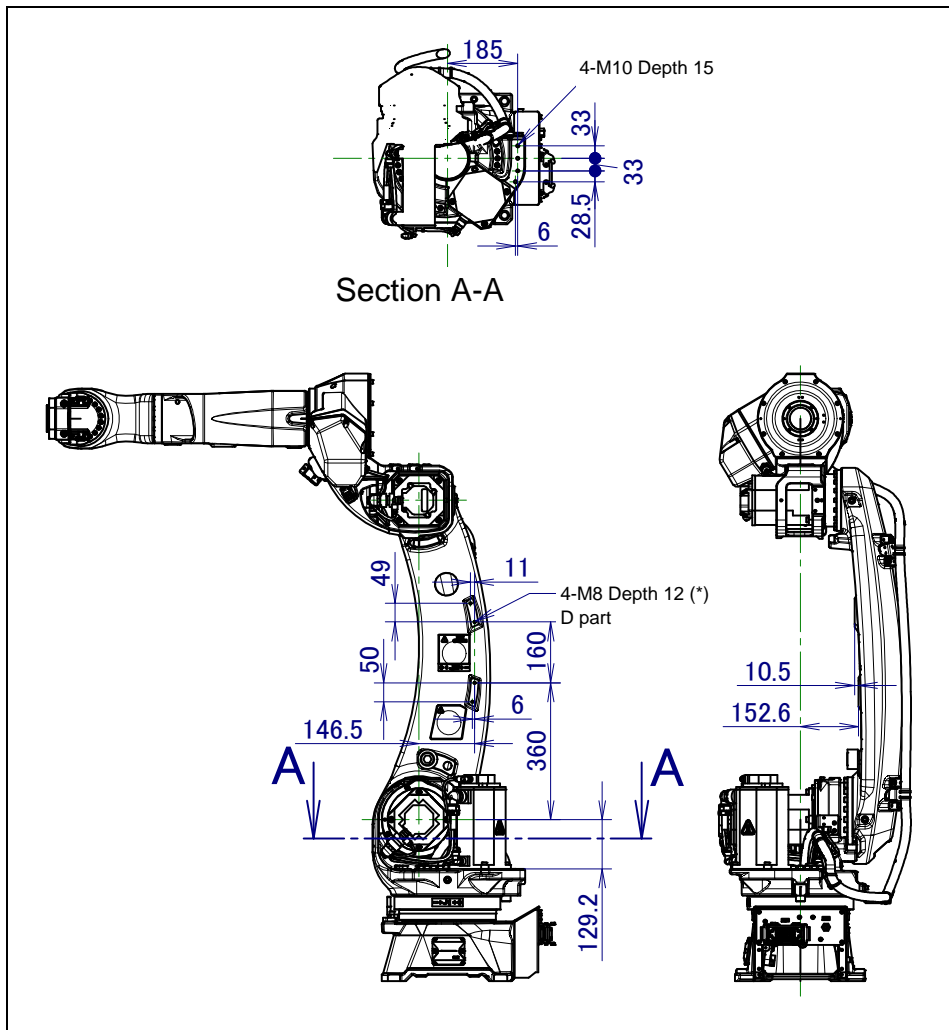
(c) Equipment mounting faces (2/2) (D part + J2 base)
